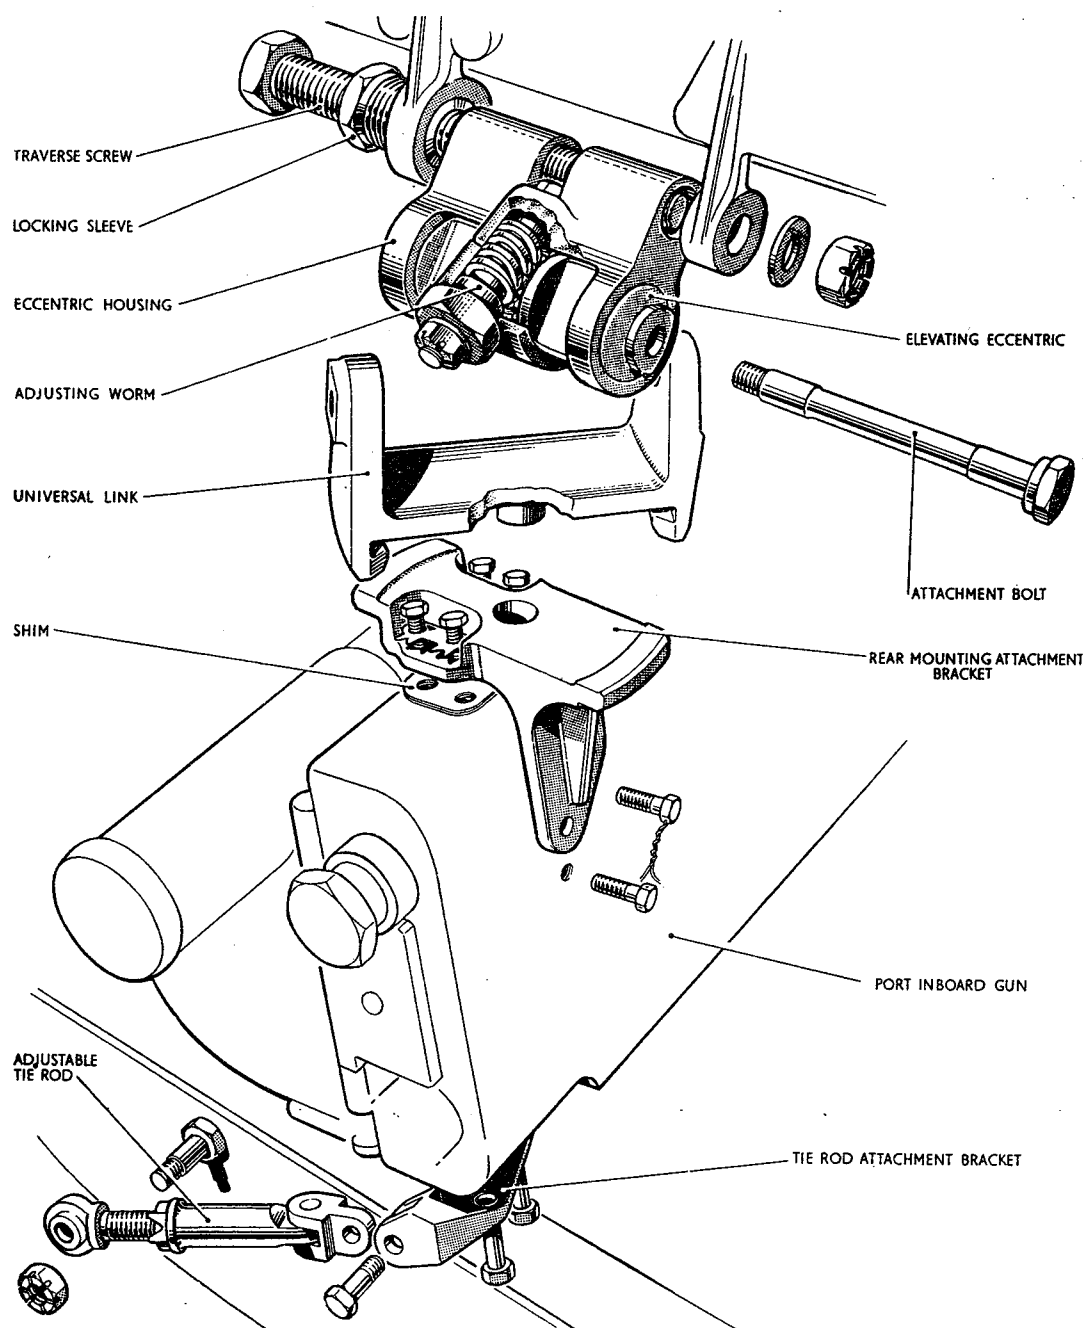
Rear gun-mounting, and mounting attachment fittings for port inboard gun, dismantled
